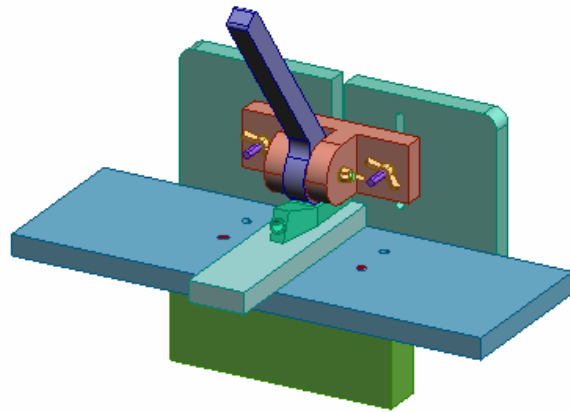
Cam Holder Bolts and Wing Nuts Installed.
